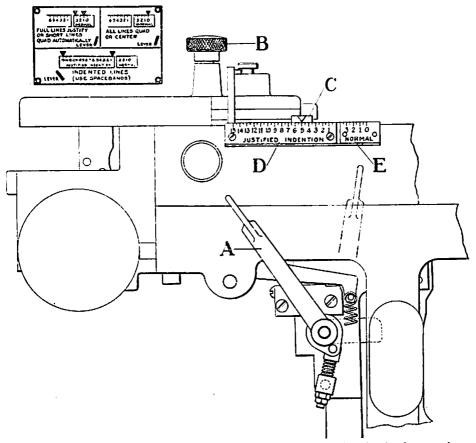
Front View of the Justified Quadding Attachment, showing the simple operating mechanism. The instruction plate shown in the illustration is mounted on top of the device. The plate shows in picture form the position of the pointer C with respect to the two scales D and E and the positions of the lever A for different kinds of composition.
